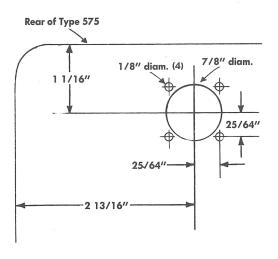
Location and dimensions of holes for mounting interconnecting plug in Type 575.
